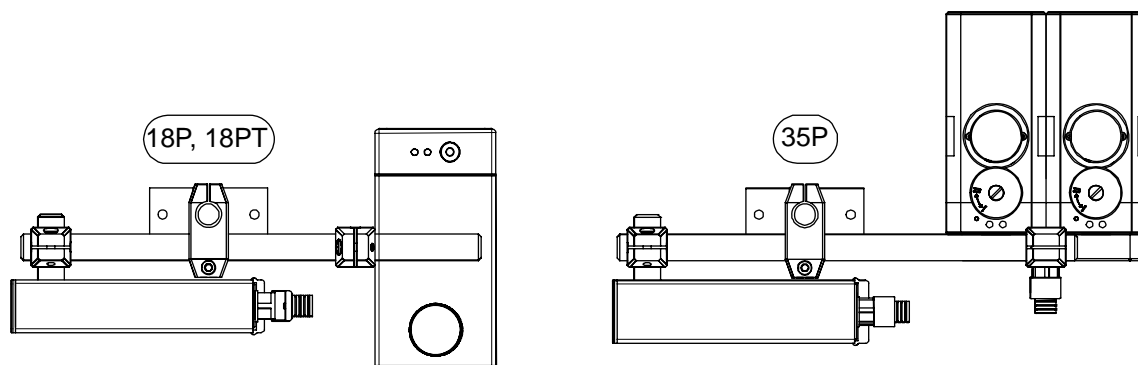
Left-handed printhead housing and perpendicular reservoir
